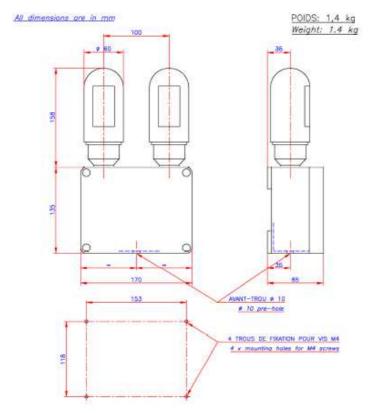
Outline and mouting dimensions Photocell Day/Twilight/Night P/N:113135
